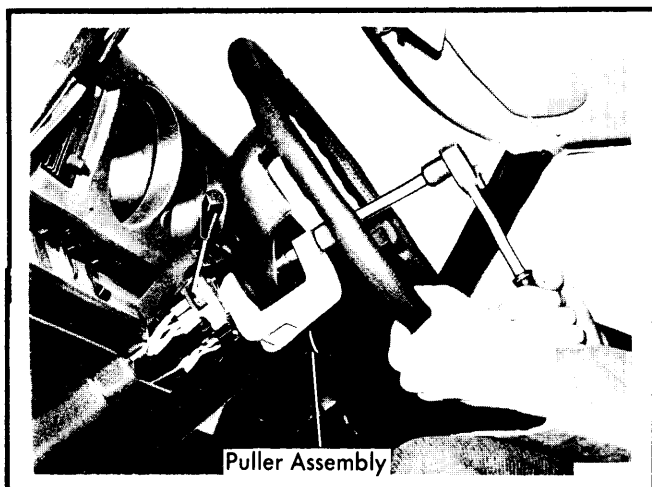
Using a Universal Puller Tool to Remove Steering Assembly
